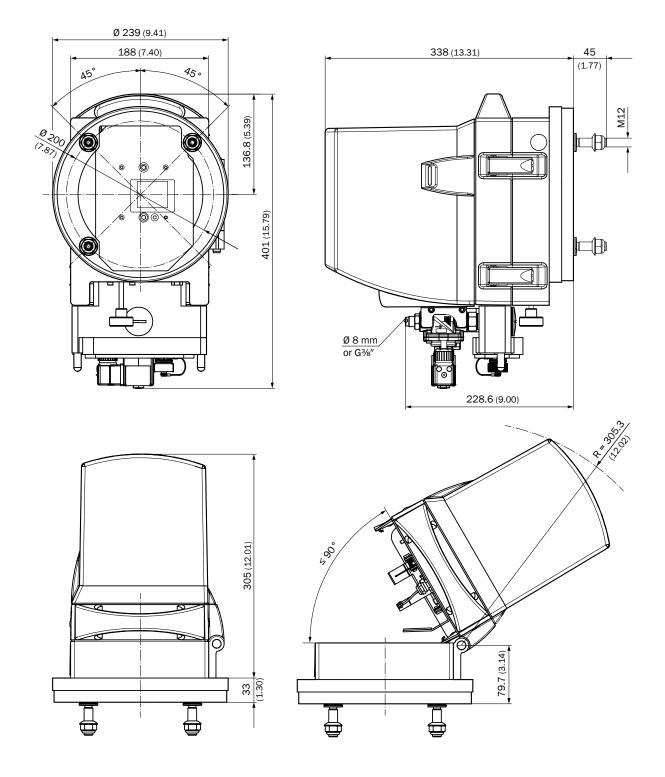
GM700 Ex 3G sender/receiver unit (all dimensions in mm)
